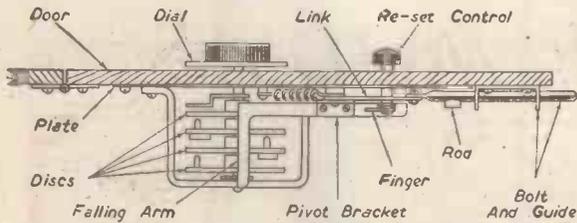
Plan of the complete lock, showing the locking bolt and knob for re-setting the falling arm.
